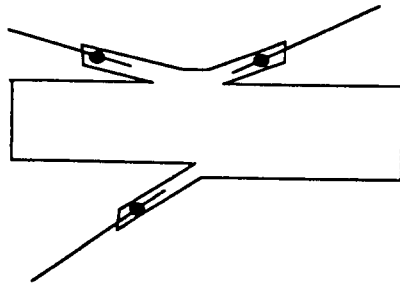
Diagram of spot welding contact to the ribbon.
